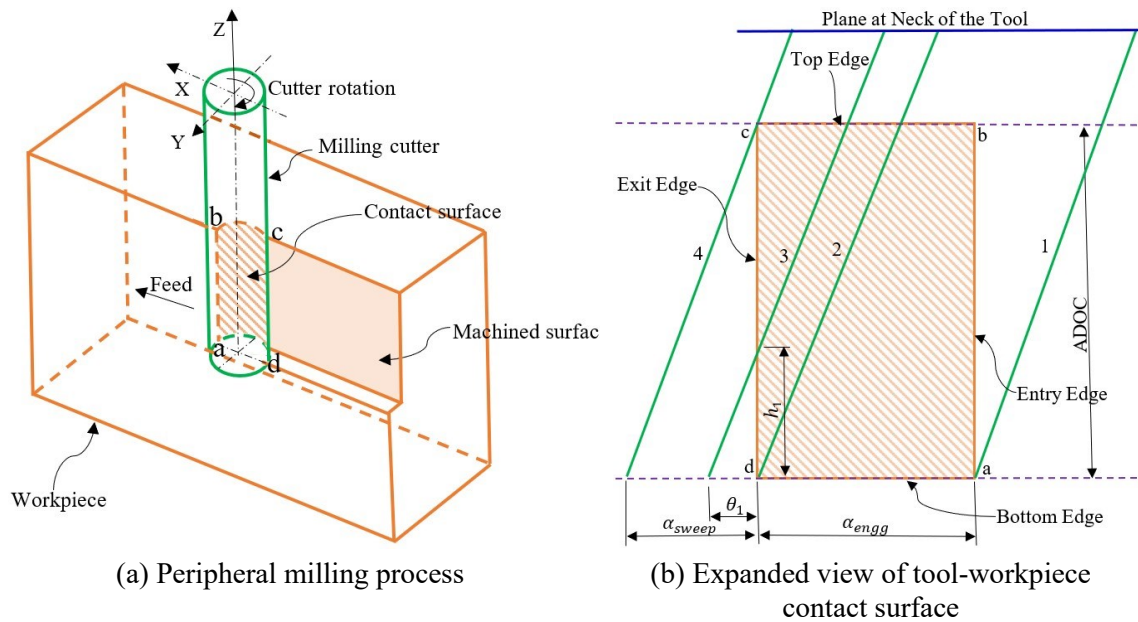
Tool-workpiece contact surface in peripheral milling
